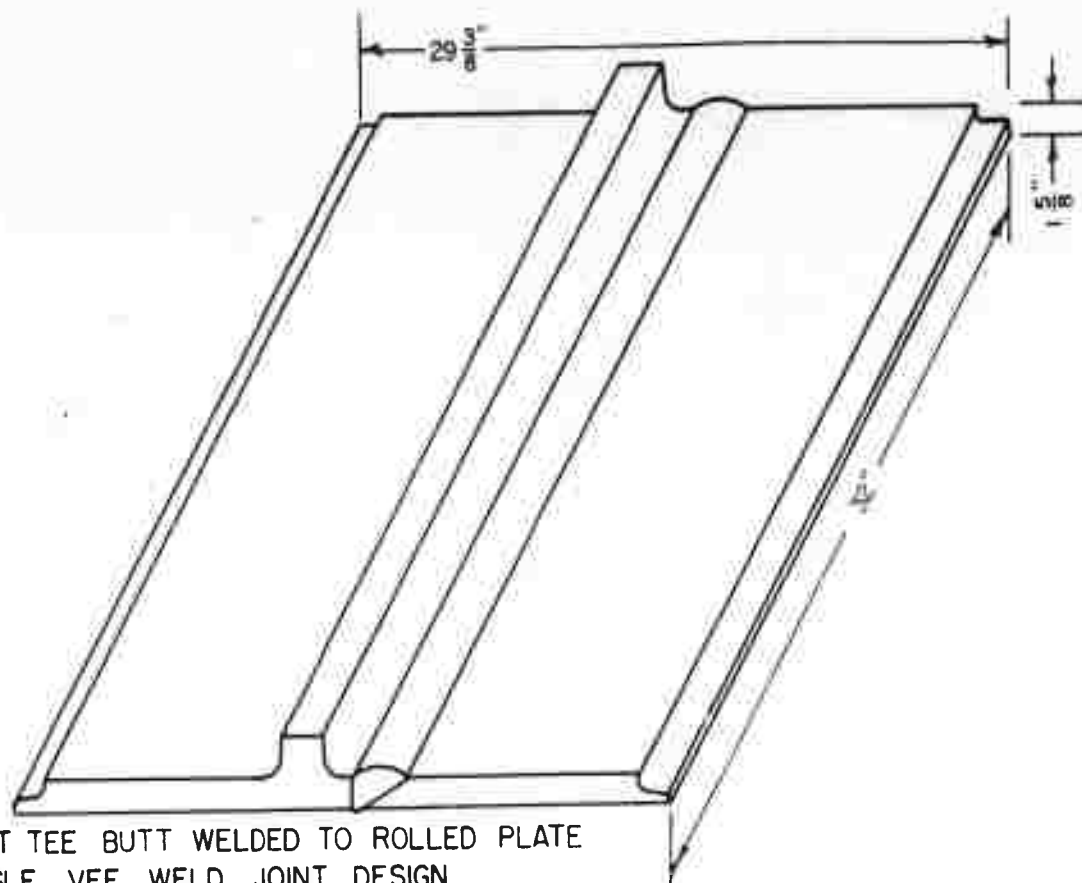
FIGURE I - PLATE TYPE FATIGUE SPECIMEN
